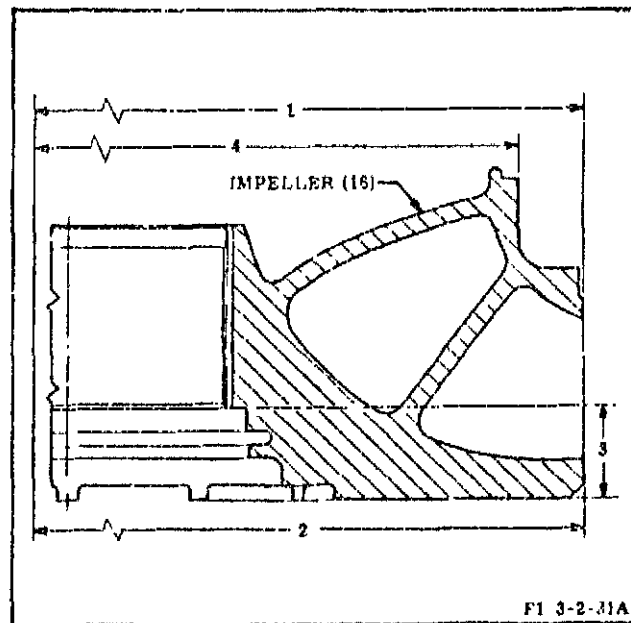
A. Measuring Oxidizer Impeller Dimensions
